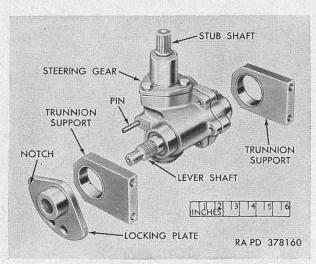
Steering gear, trunnions, and locking plate as removed from vehicle—exploded view.
